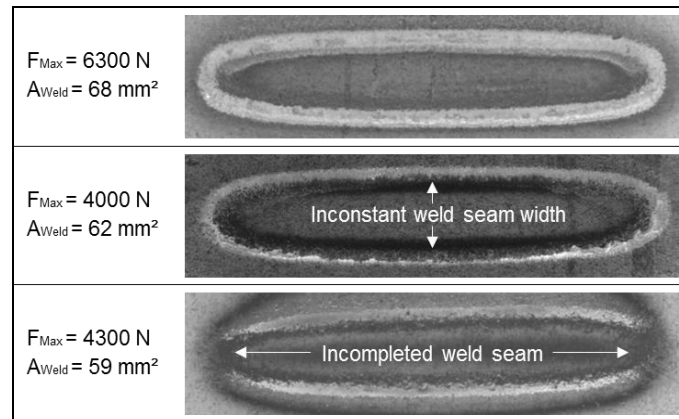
Images of colour-etched target sheets (S235JR) in the collisions area. Top: Completely and with constant width formed weld seam. Middle: Completely, but with inconstant width formed weld seam. Bottom: Incompletely formed weld seam.
